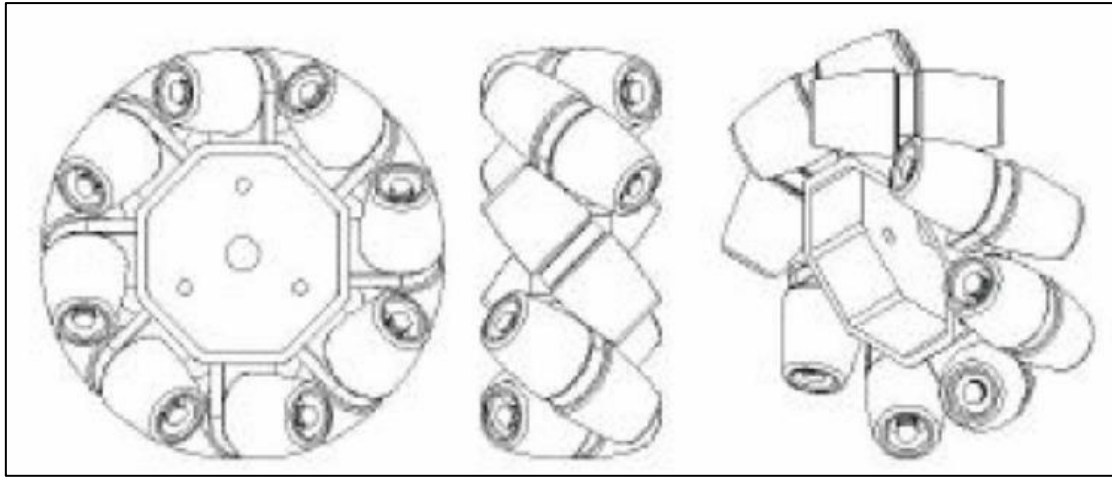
Mecanum Wheel with Centrally Mounted Rollers
